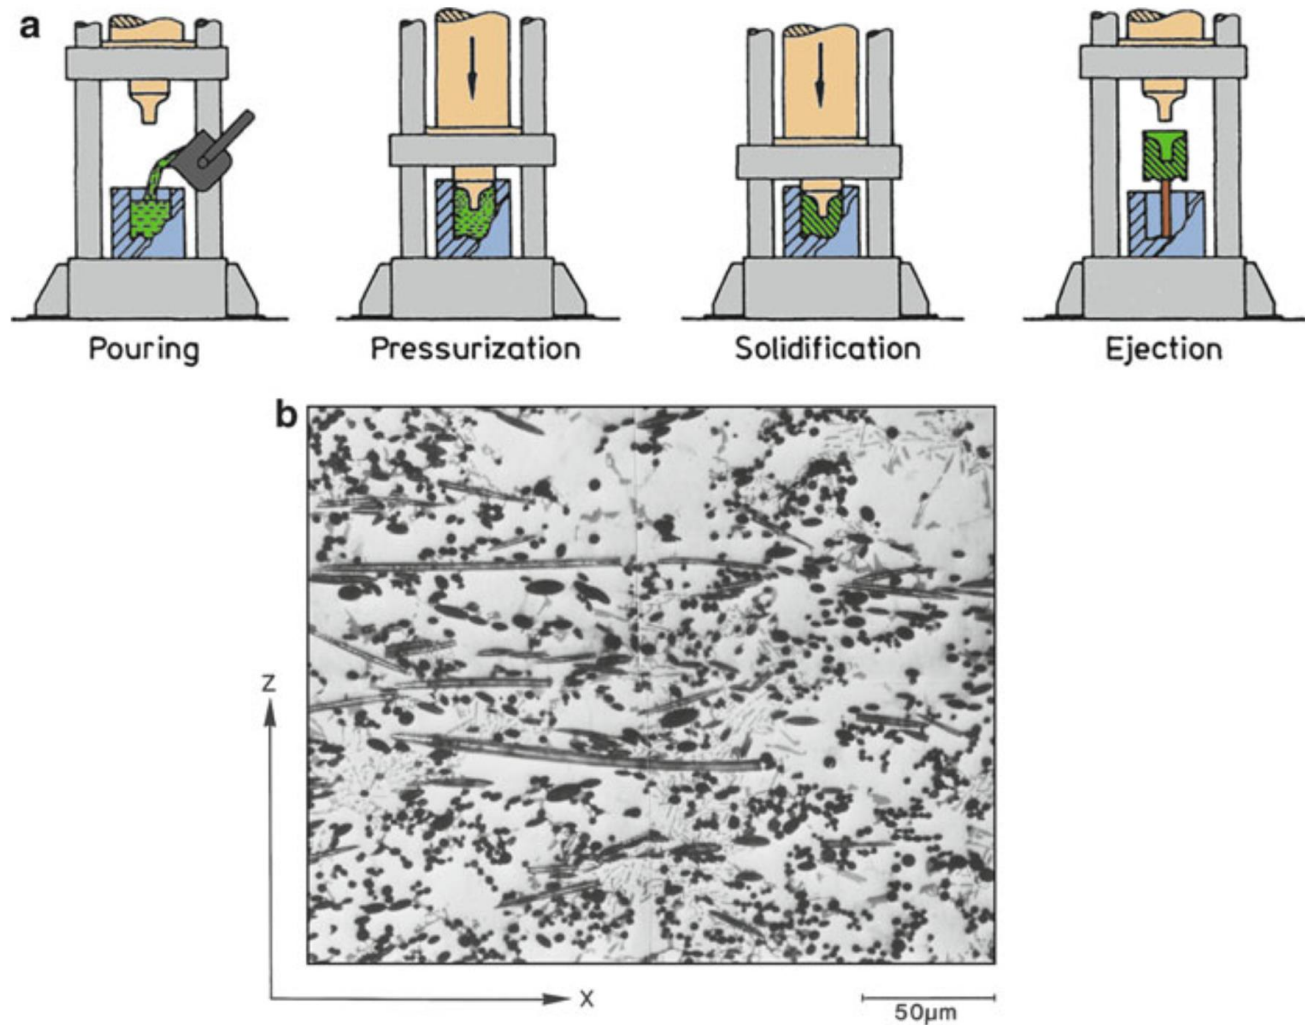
(a) Squeeze casting technique of making a metal matrix composite. (b) The microstructure of Saffil alumina fiber/aluminum matrix composite made by squeeze casting. [Courtesy of G. Eggeler]
